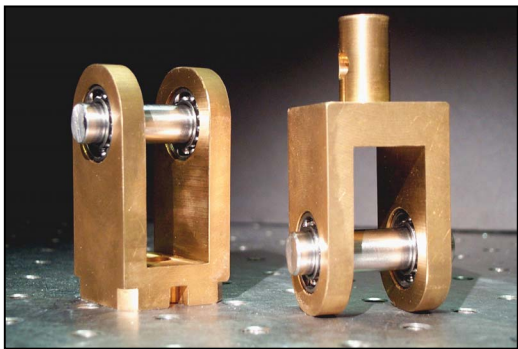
Photograph of clevises for use with the Instron testing machine in loading the compact tension specimens.
